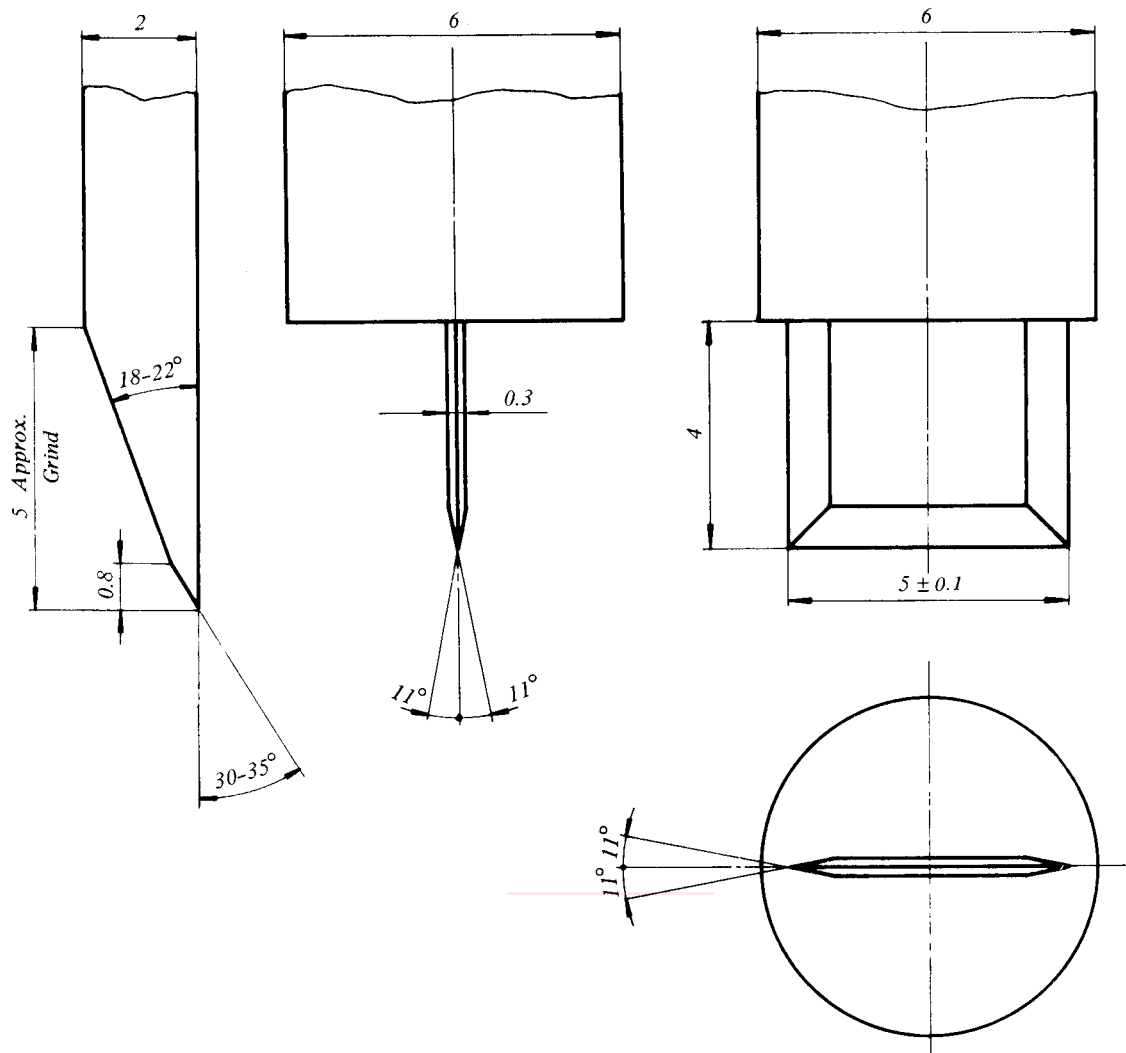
Enlarged details of Delft tear test piece die cutting edges
